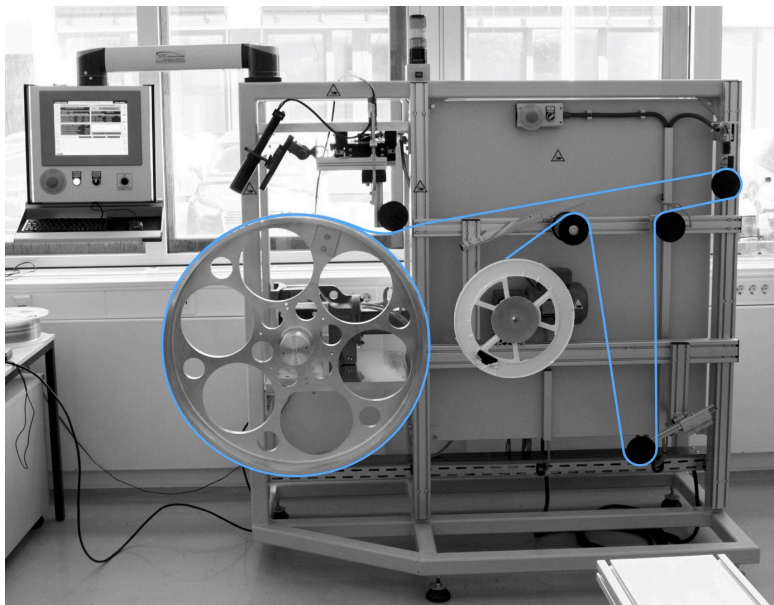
Serial production winding machine. The path of the scintillating fibre is indicated in blue.
